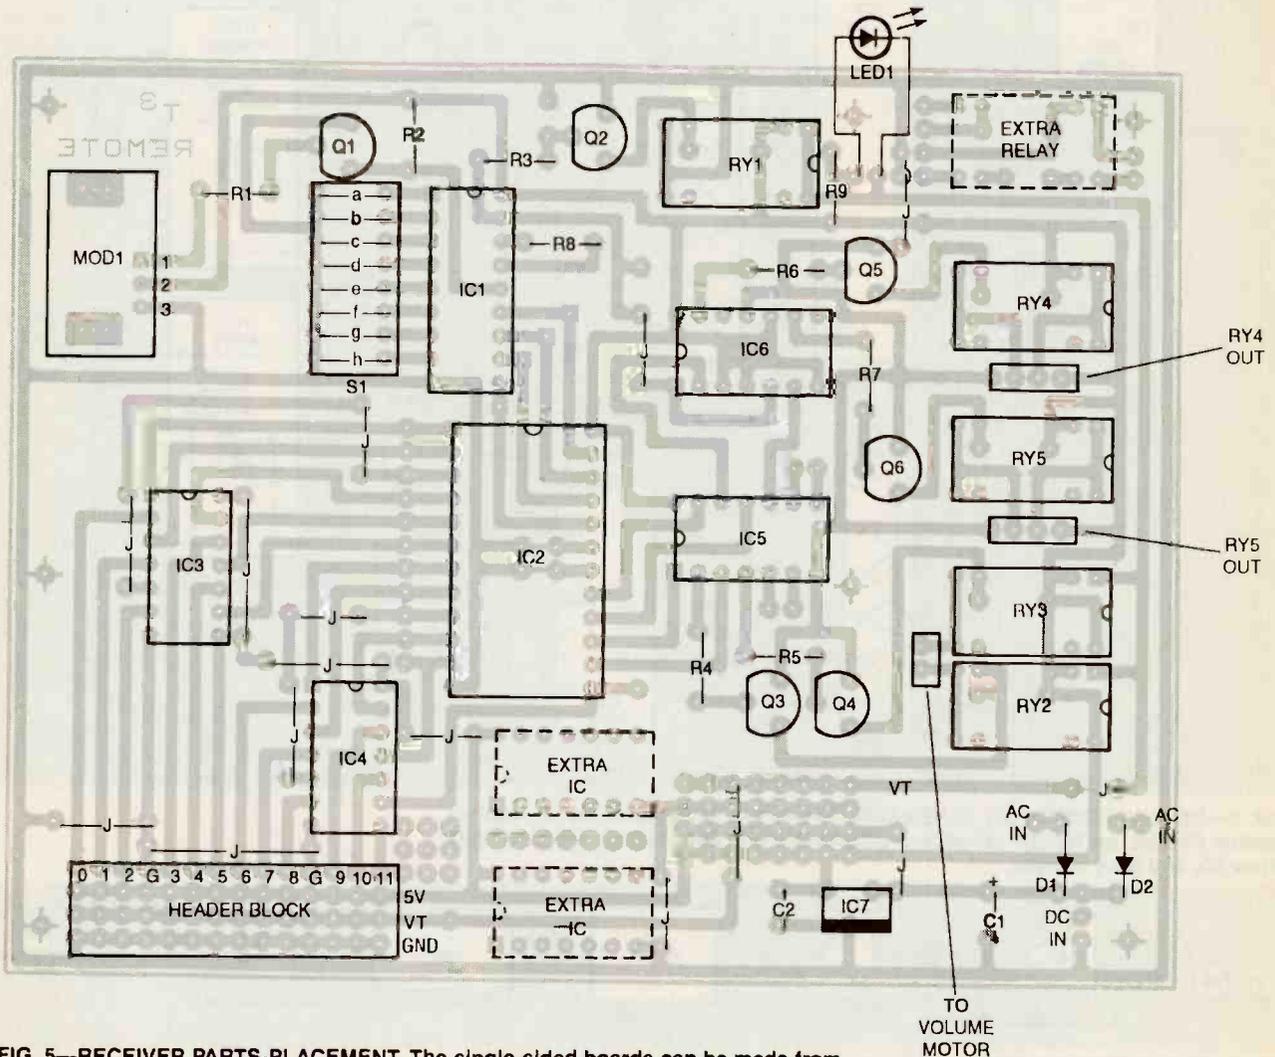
RECEIVER PARTS-PLACEMENT. The single-sided boards can be made from the foil patterns provided here.
